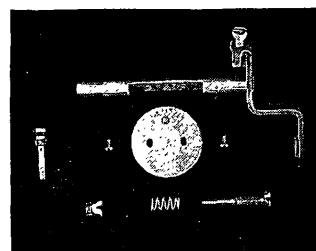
Assemble idle circuit parts as shown. Never reinstall a used low speed jet. Remove all carbon from bore of casting
